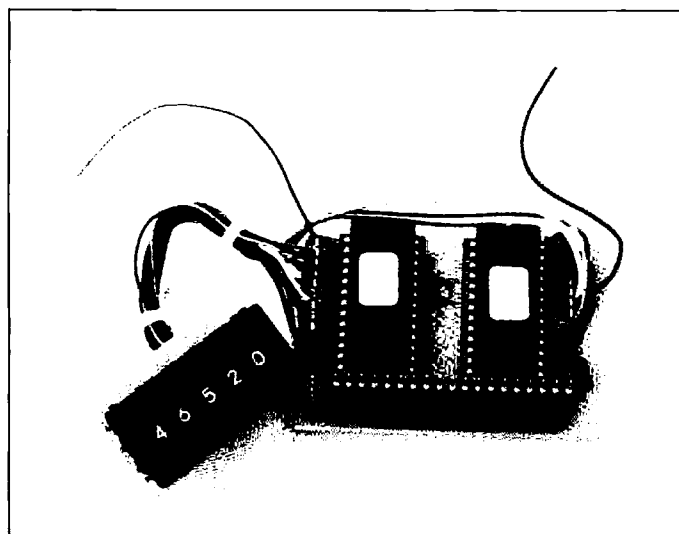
Photo B. The completed EPROM board and thumbwheel switch assemblies. Note the 19-pin header which allows the circuit to plug in directly to the FX-146 PC board.
